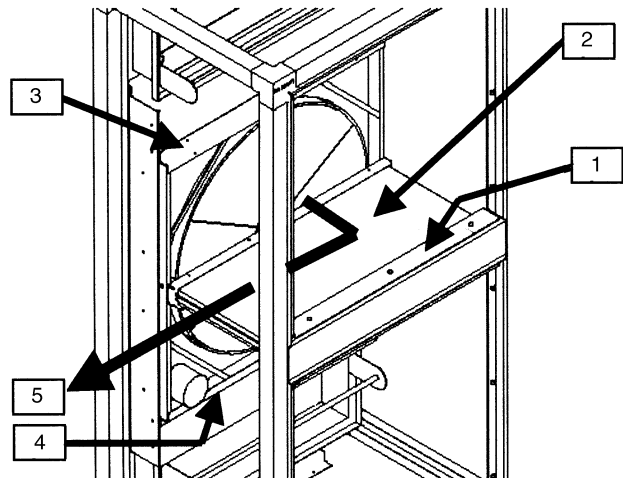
Remove Wheel for Cleaning (Sizes 03-06 Only)
